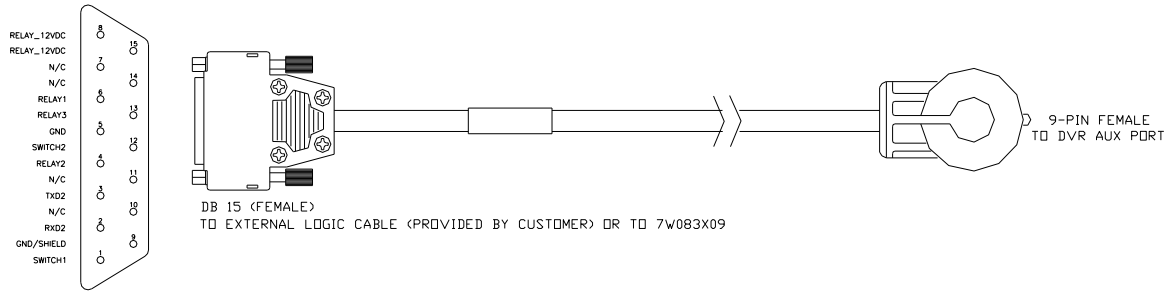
DVR Auxiliary Cable - 7W083X06-01
